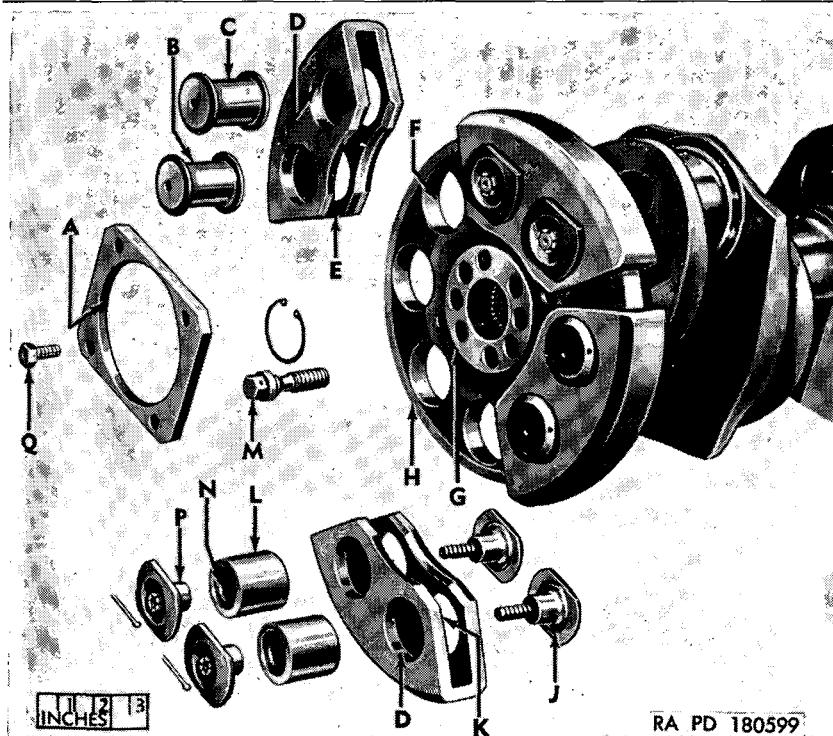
Repair and rebuild standard points of measurement for crankshaft vibration damper.
